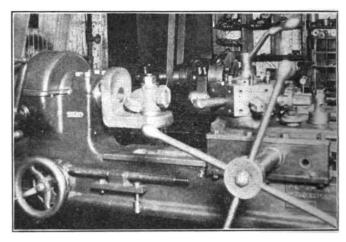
Angle Cock in Position to Receive the Centering Tool
